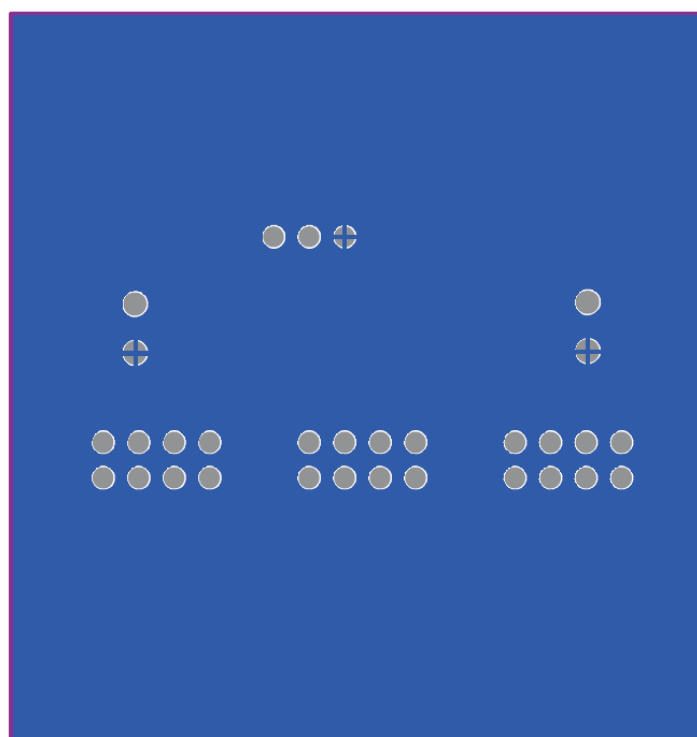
TPS22921/22/22B EVM Bottom-Side Layout
